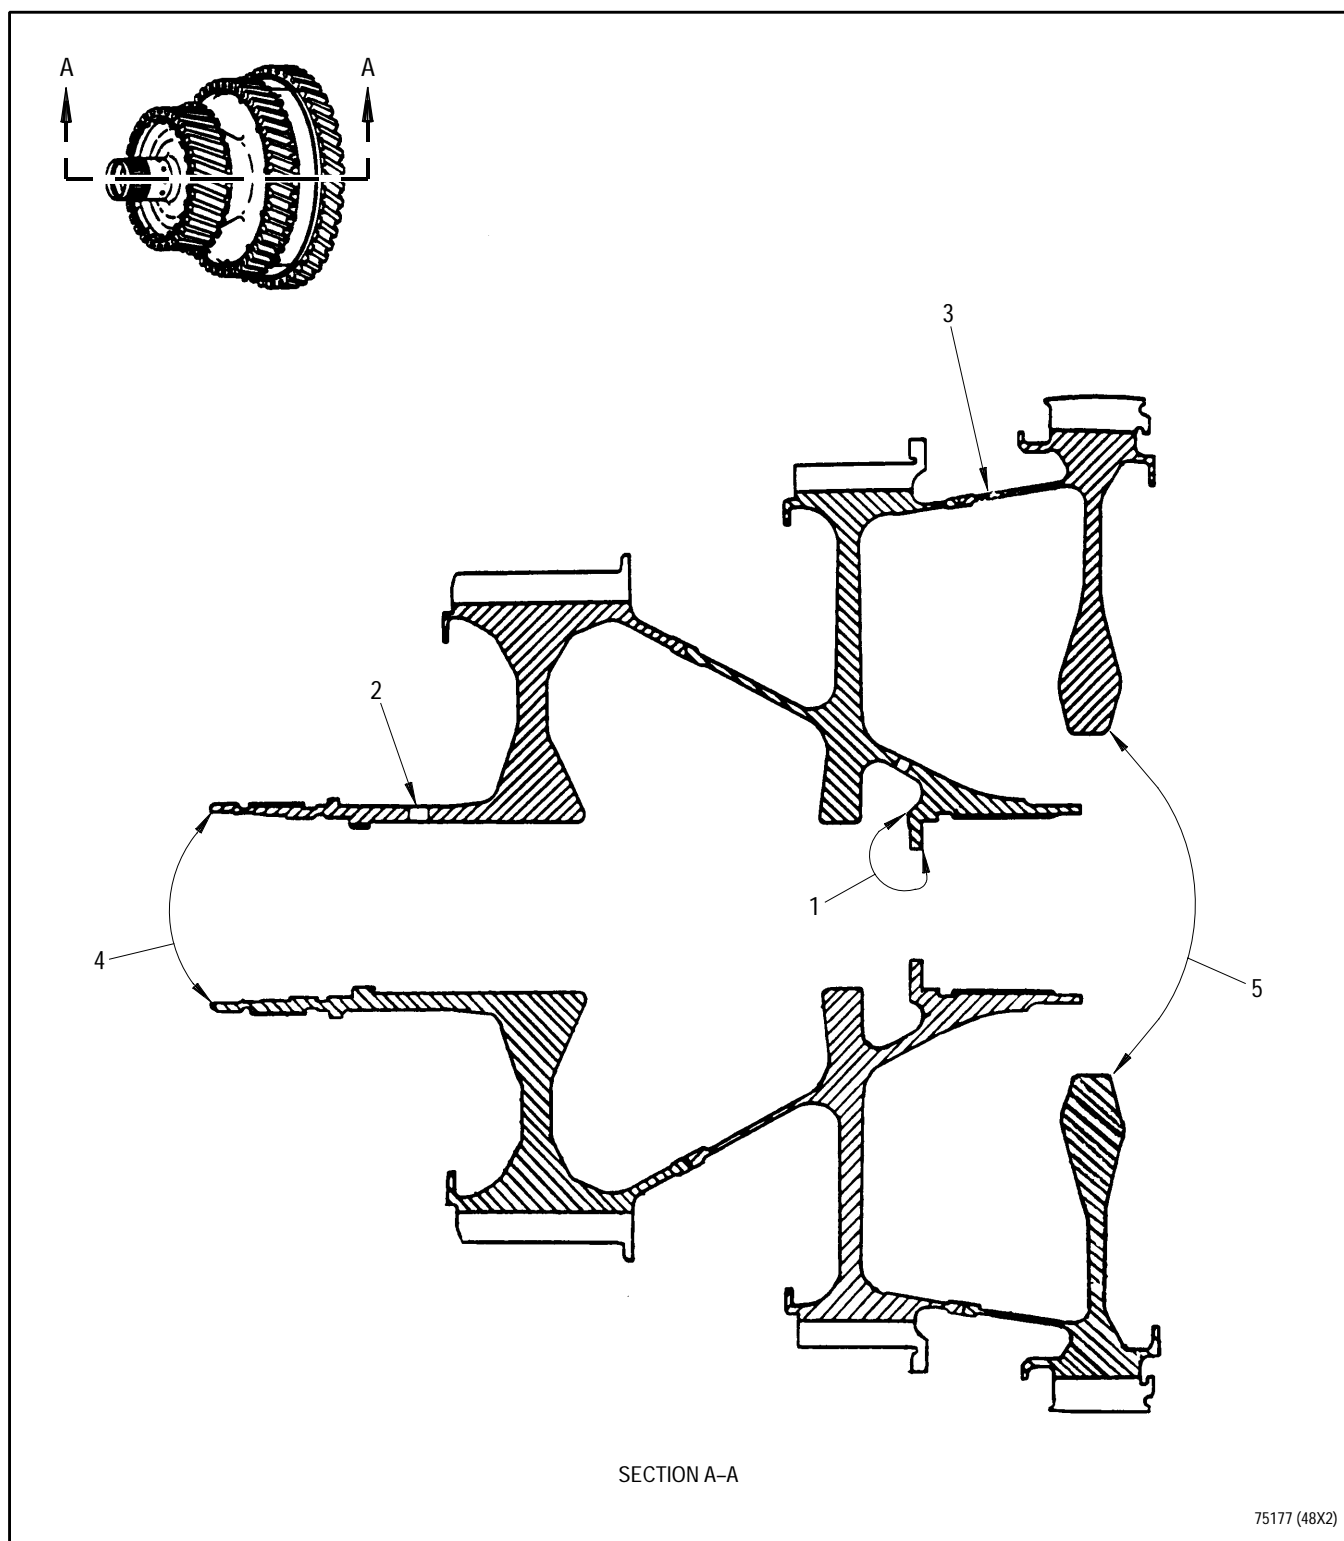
Front Compressor Drum Rotor Disk Assembly - Masking For Removal of Copper Nickel Deposits
